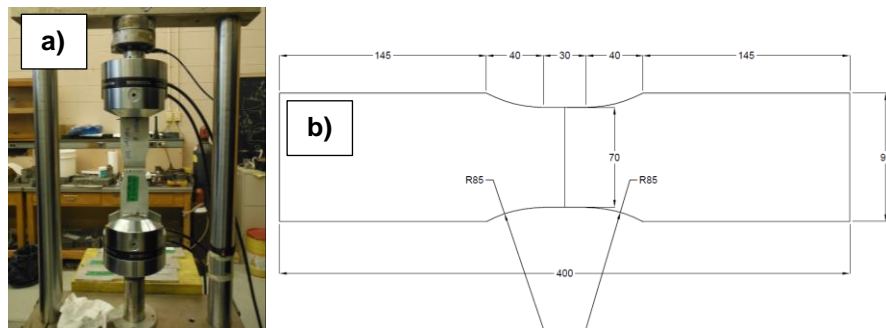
Fatigue test details a) Test frame b) Dog-boned specimen details
